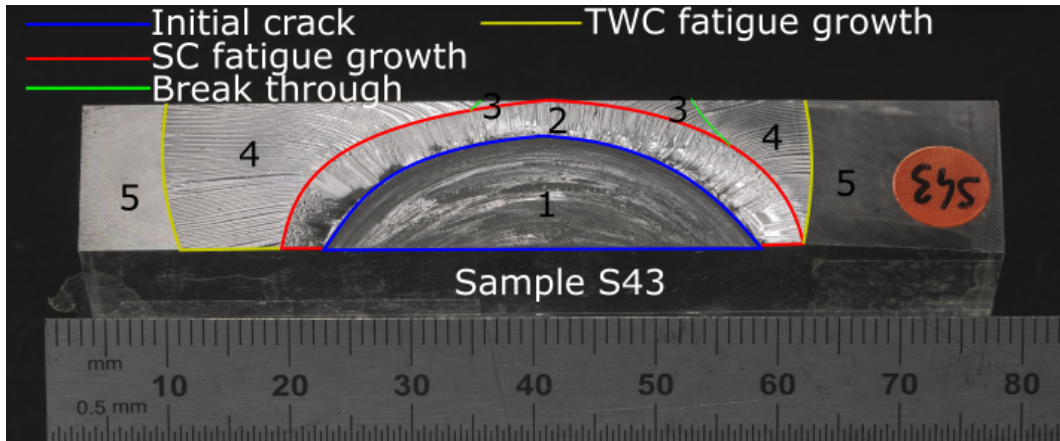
Test on Perspex plate - Fracture surface - Sample S43
